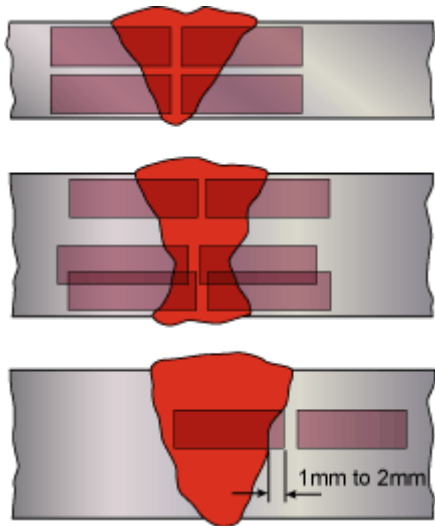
PD5500 App D. location of Charpy specimens in weld HAZ
